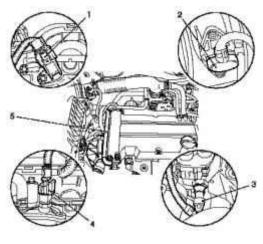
Components shooting in dismantling the camshaft sensor: 1 - camshaft sensor connector, 2 - plug the sensor mass air flow, 3 - oil pressure sensor connector, 4 - slot coolant temperature sensor, 5 - posting
